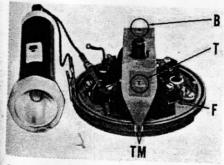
Timing fixture installed and aligned with armature plate timing marks (TM) for adjusting points for upper cylinder.
